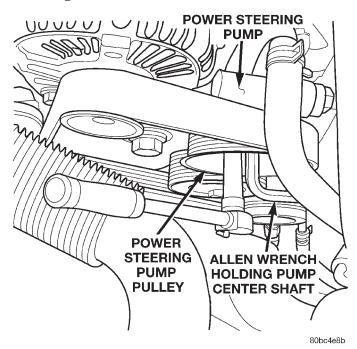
Removing Power Steering Pump Pulley Retaining Bolts
